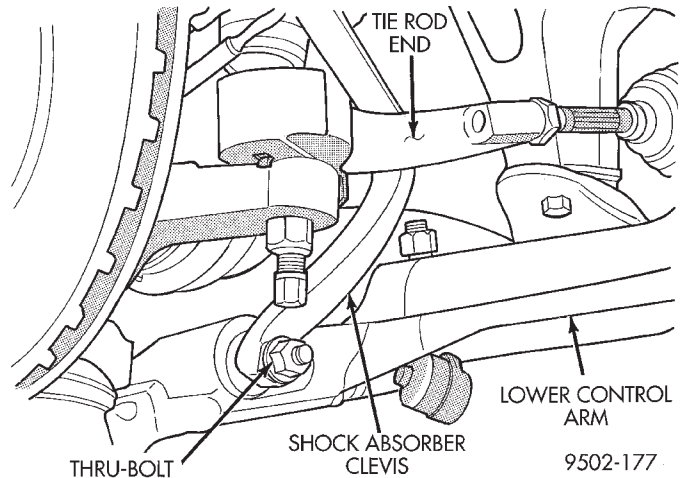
Shock Clevis To Lower Control Arm Bolts
